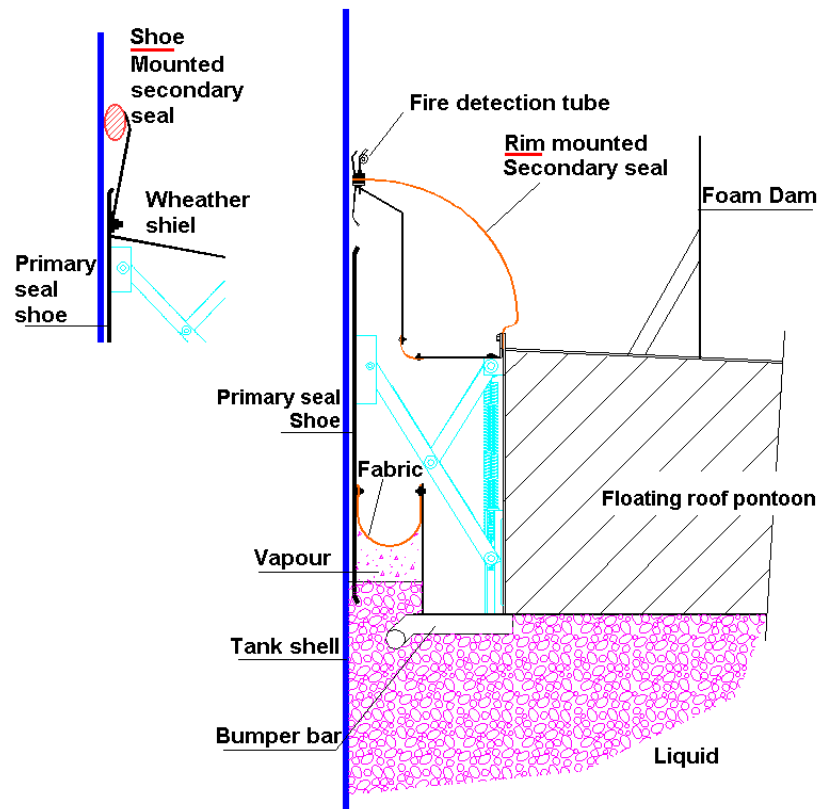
Liquid mounted mechanical shoe seal with a shoe mounted and a rim mounted secondary seals (typical)
